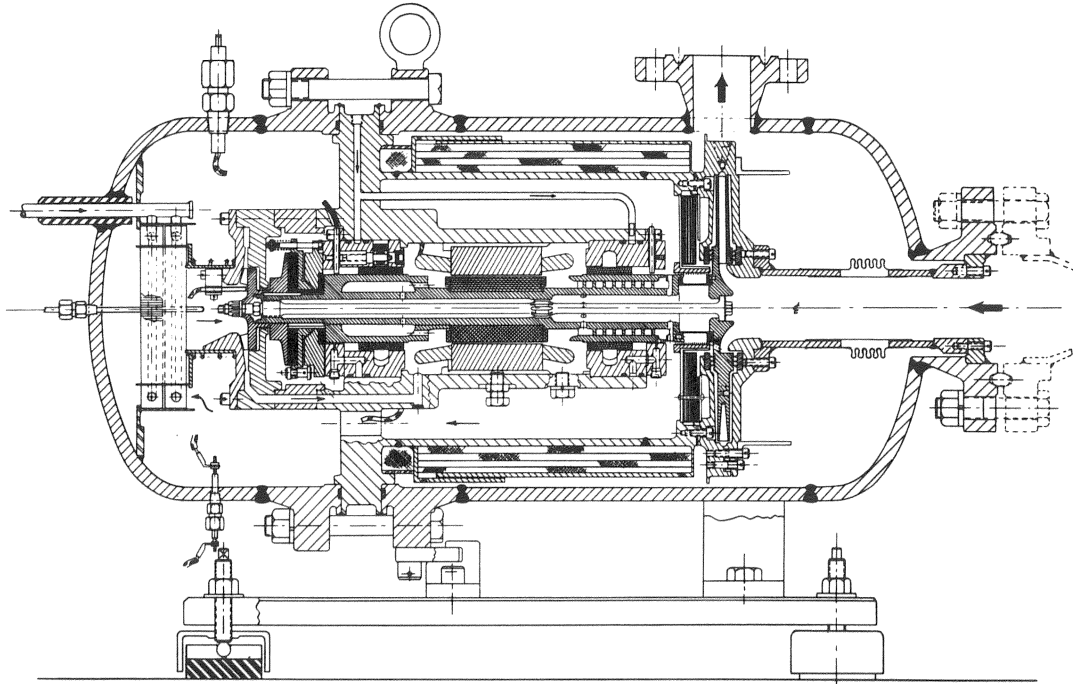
Helium Circulator. (developed by Mechanical Technology, Inc.)
